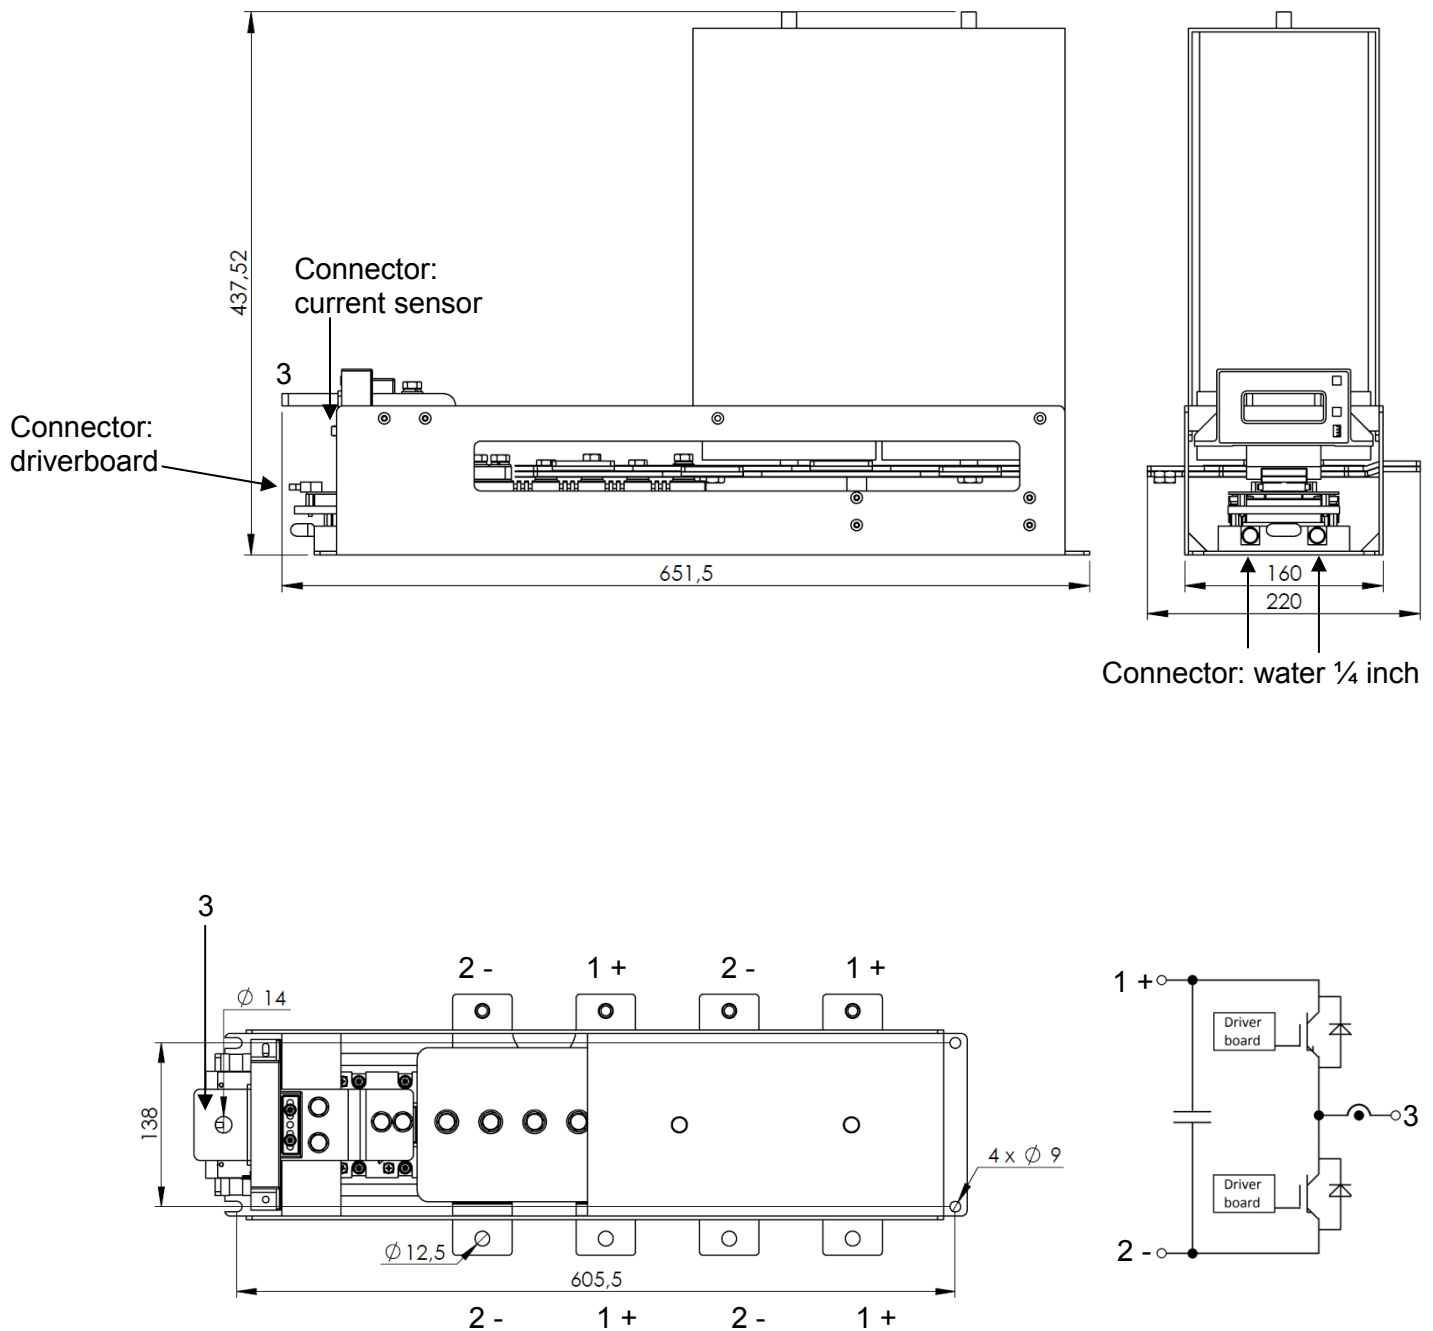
Mechanical drawing of the VARIS™-14-17-W (water cooled)
